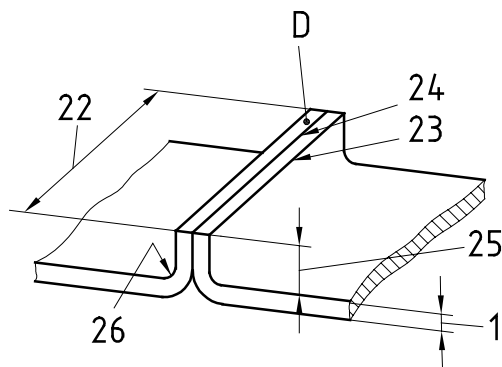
Preparation for butt weld between plates with raised edges
